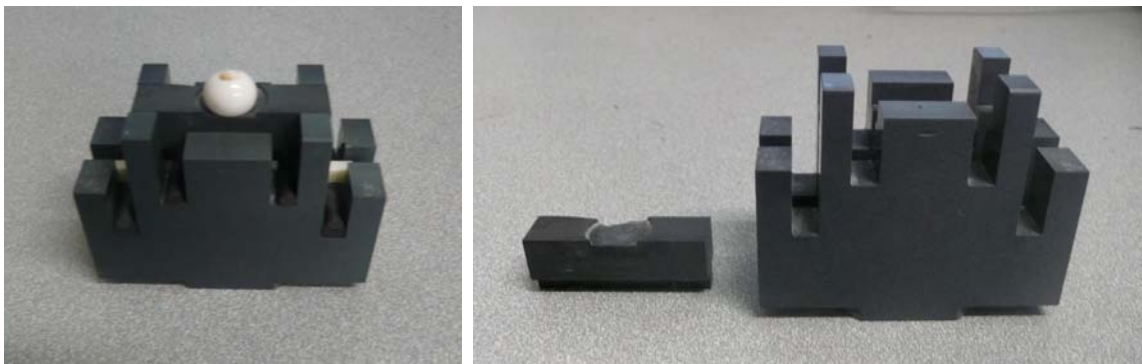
(a) Test fixture setup at high temperature (b) Detailed view of top part and bottom part of test fixture
